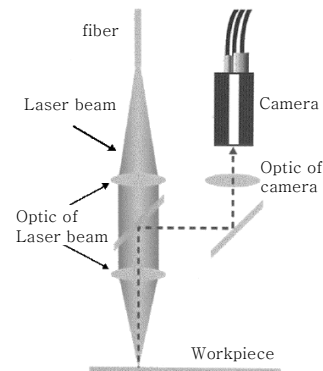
Co-axial monitoring system for Nd:YAG laser welding
